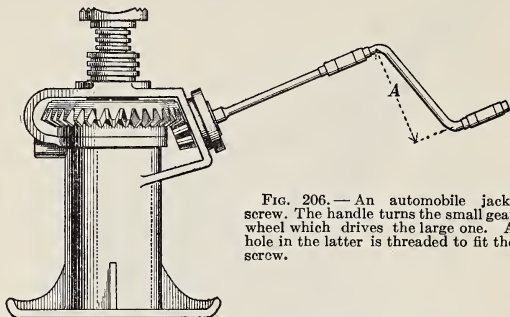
An automobile jack-screw. The handle turns the small gear wheel which drives the large one. A hole in the latter is threaded to fit the screw.
